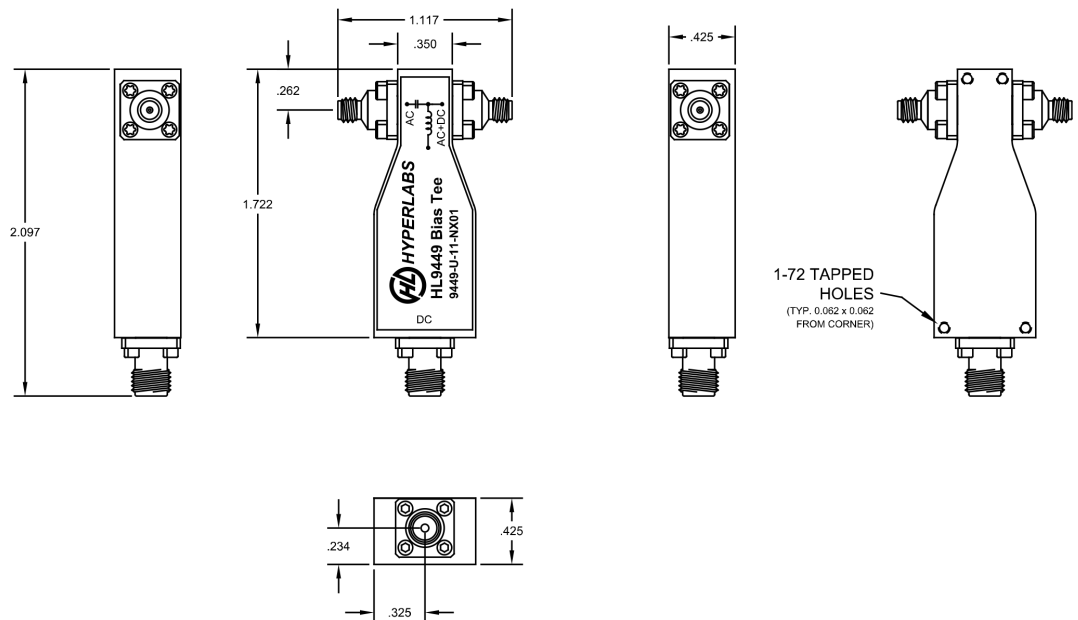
HL9449 with SMA DC bias port Mechanical Drawing
